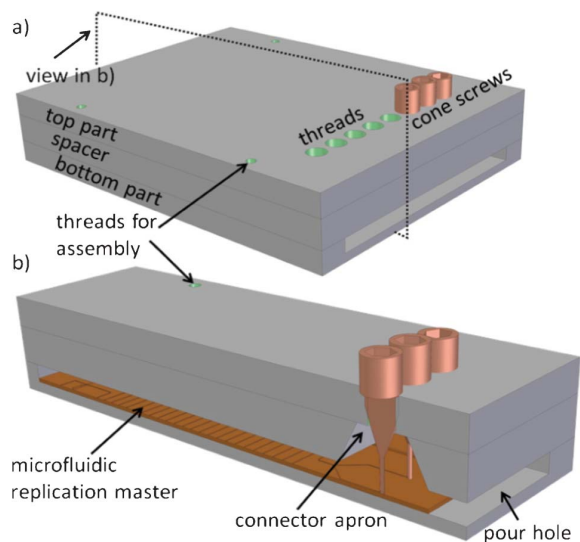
Computer aided design (CAD) view of the molding tool used to create chips as shown in Fig. 4.1c). a) Assembled molding tool with three cone screws inserted and five threads left for additional cone screws or to be sealed with stud screws. The four smaller threads are used to screw the three parts of the molding tool together. b) Cut view of a) displaying the inside of the molding tool. The bottom part serves as a tray for the replication master and has an opening through which polydimethylsiloxane (PDMS) prepolymer can be poured. The spacer shapes the connector apron. The replication master is kept in place by the cone screws which also define the cone-shaped form of the individual inlets. Once the PDMS is cured and the chip is placed on the LHS, the pipetting needles can be connected to the microfluidic network by these connector ports. Digital 3D models of these components can be downloaded from the Electronic Supplementary Information (ESI).
